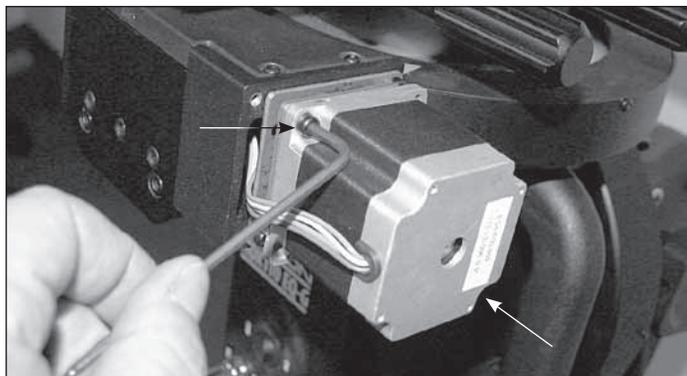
Loosen by a quarter turn the two diagonally opposed screws that fasten the motor to the seat plate.
